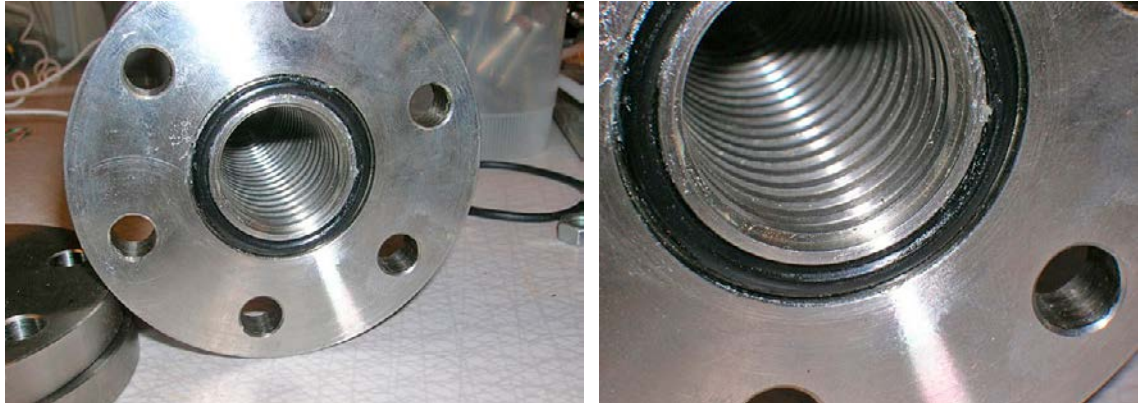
Photos of the rectangular shaped grooves inside the tube used for specimen FLR1.
